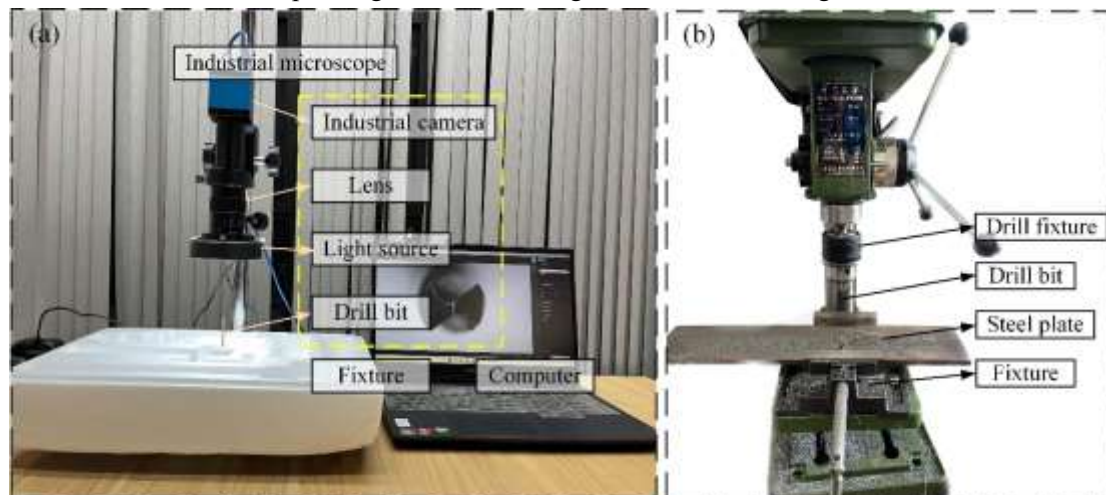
Experimental setup used for obtaining tool wear images: (a) shooting equipment; (b) processing equipment.
